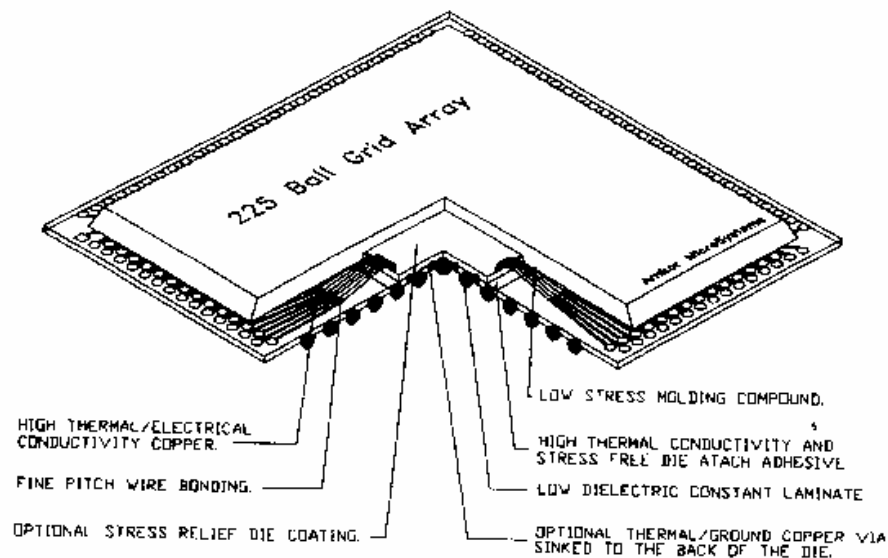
Cross-section of a PBGA package [Lau, 1995]
